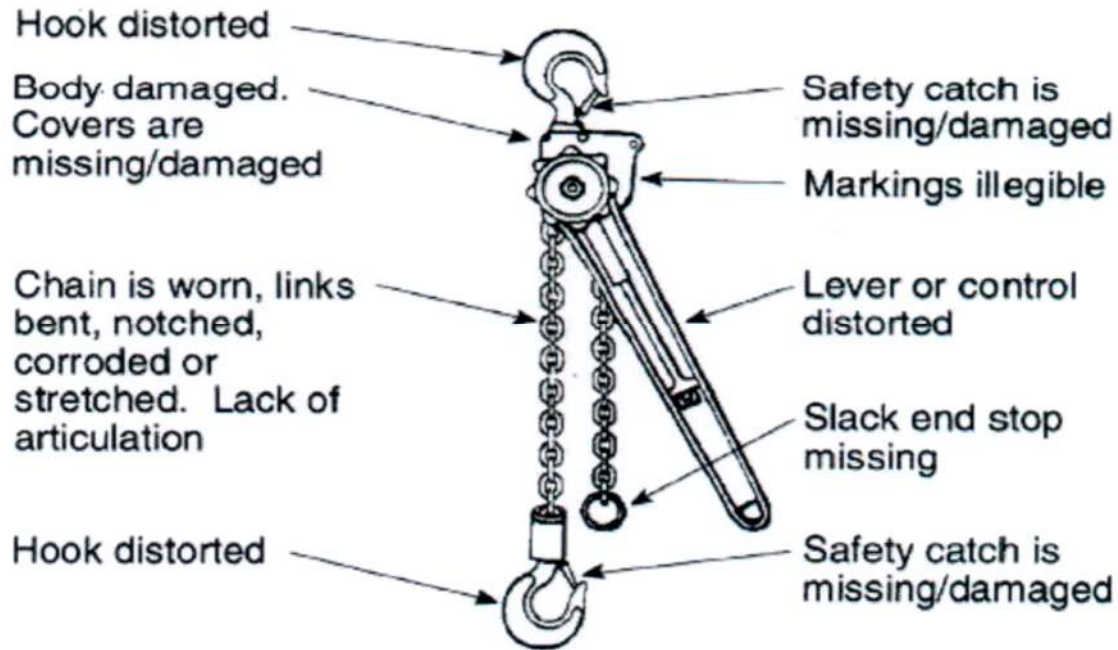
Inspection points and possible defects of hand operated lever hoists
